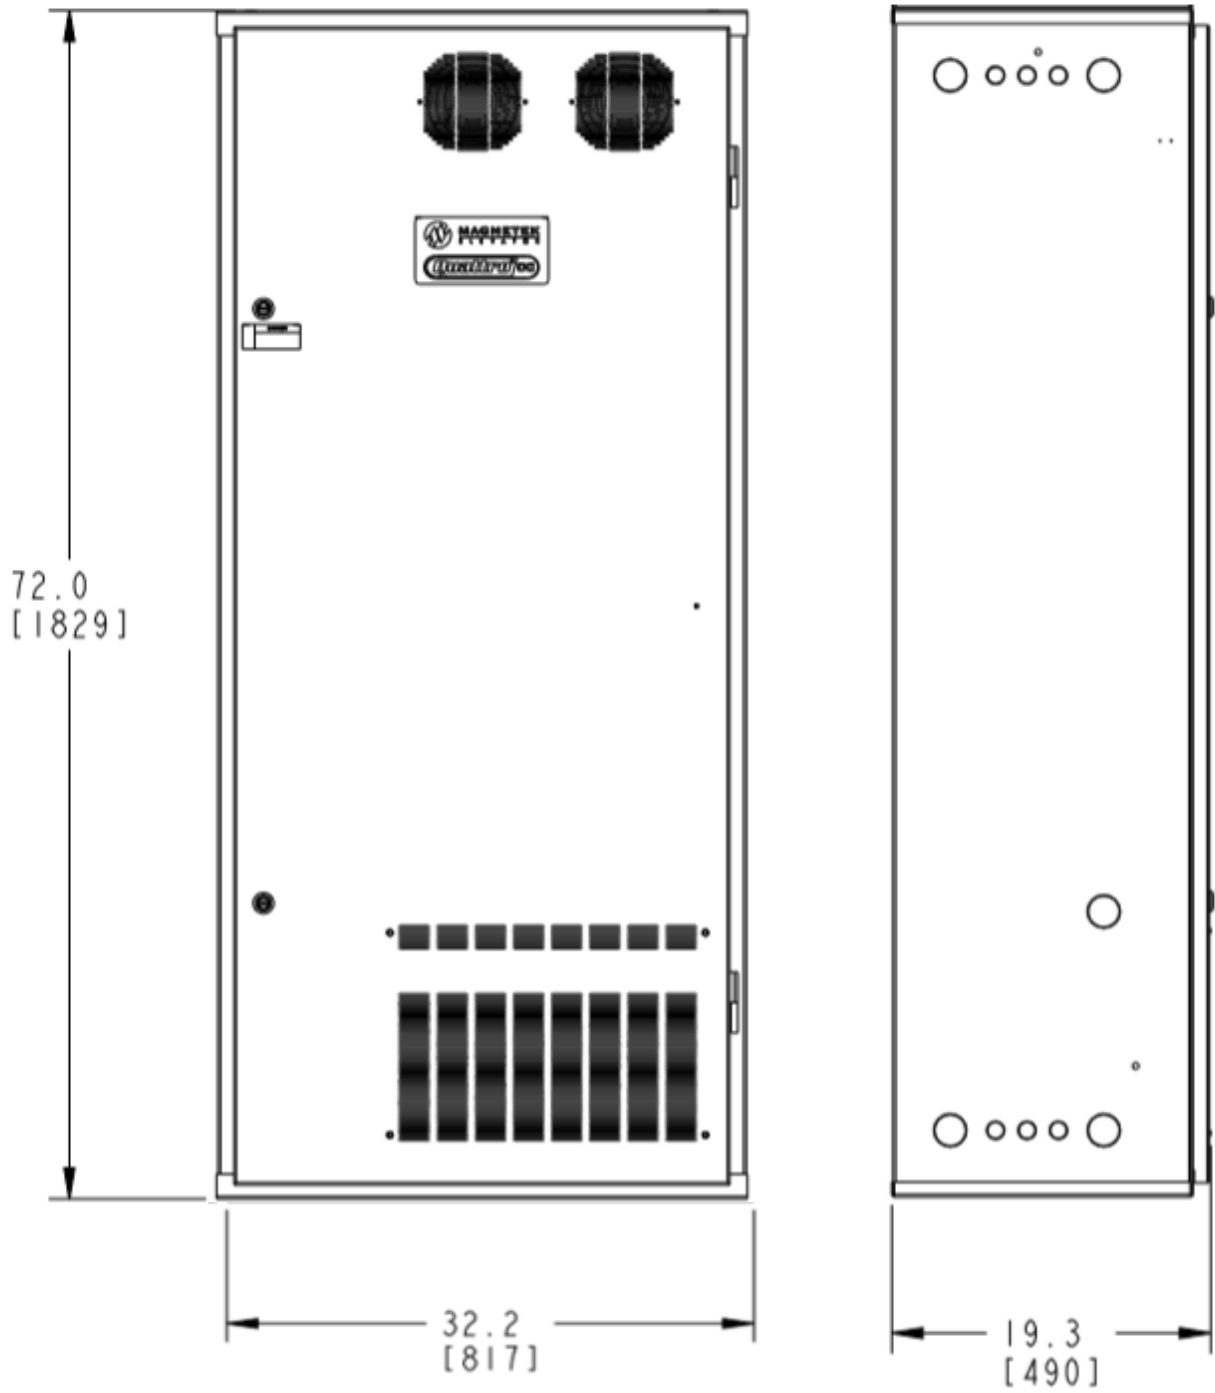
Dimensions with optional Customer I/O Panel no Top Hat
